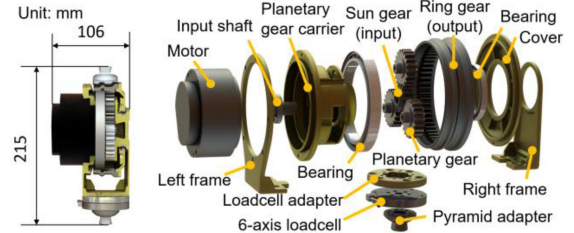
Sectional and exploded view of our actuator design. By using sun gear as input and ring gear as output, we reduced the rotational inertia of the planetary gear carrier and revolution inertia of the planetary gears (15). The reduced overall inertia helps our actuator to achieve high intrinsic compliance.
